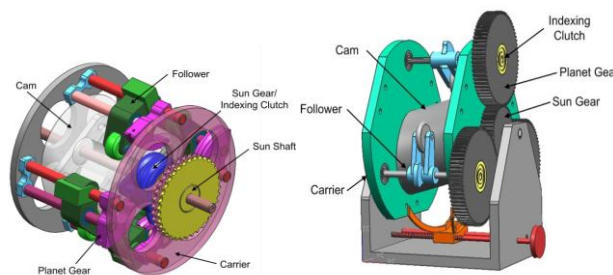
The complete prototype of the Cam-based IVT planet rears and the version has its sprag clutches in the sun gears.
